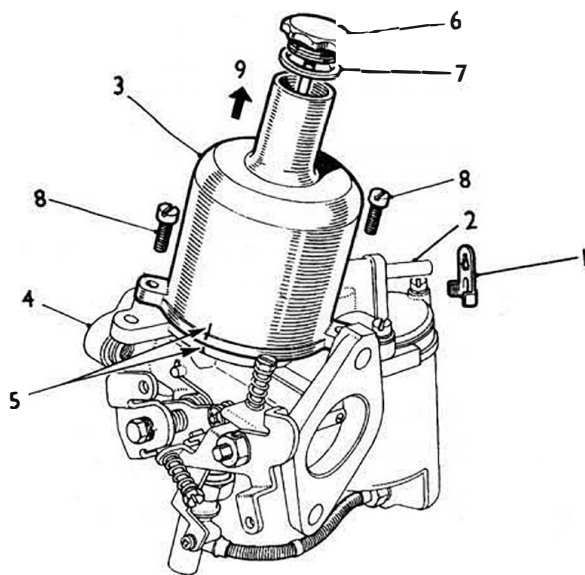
DISMANTLING THE HS6 CARBURETTOR - STAGE 1
